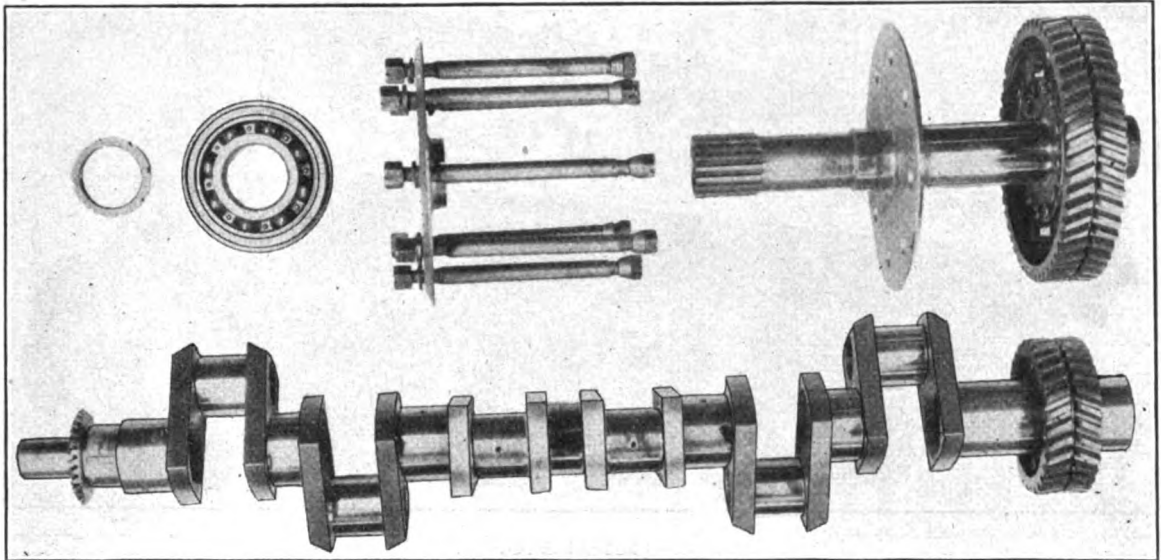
Crankshaft, reduction gear, propeller shaft, and propeller hub.
